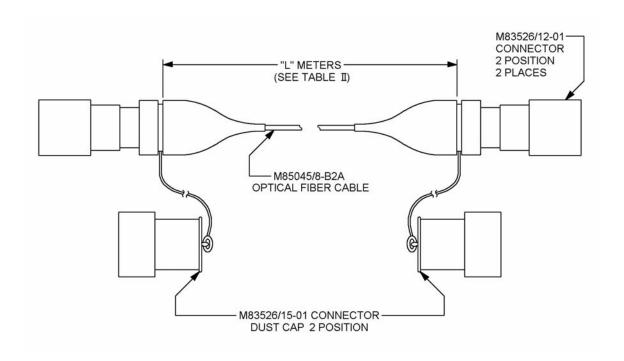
Outline drawing, cable assembly (hermaphroditic) fiber optic, test.
